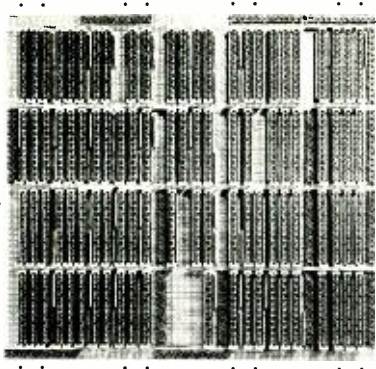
Platter assembled with connectors and terminating-resistor modules.
